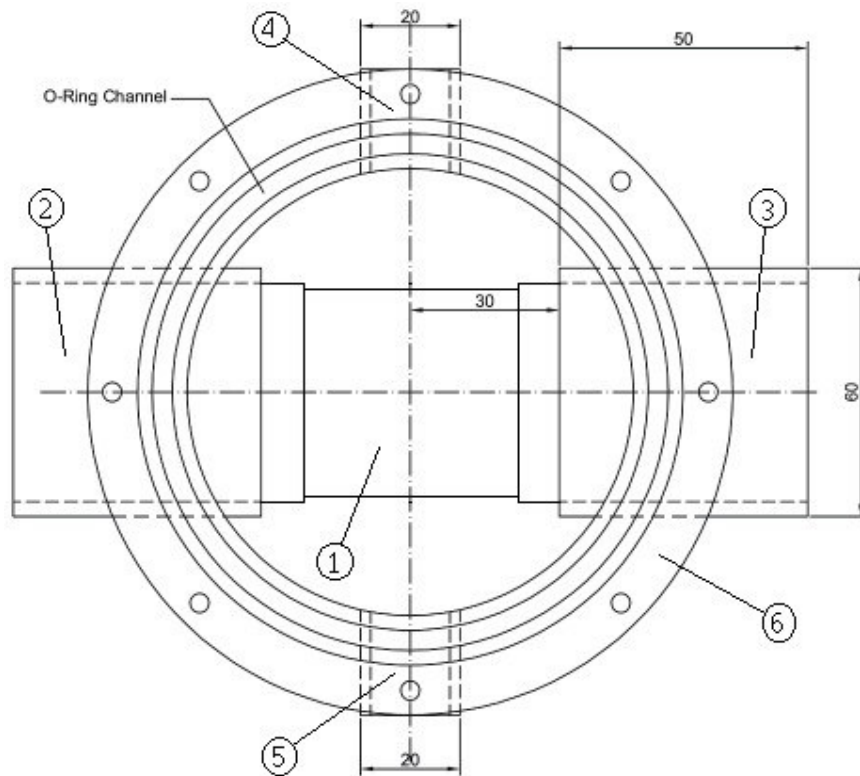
Drawing of the test section - front view (1. Gold coated horizontal condensation tube, 2. Inlet of test section for cooling water, 3. Exit of test section for cooling water, 4. Inlet of test section for steam, 5. Exit of test section for condense steam, 6. Observation window ).
